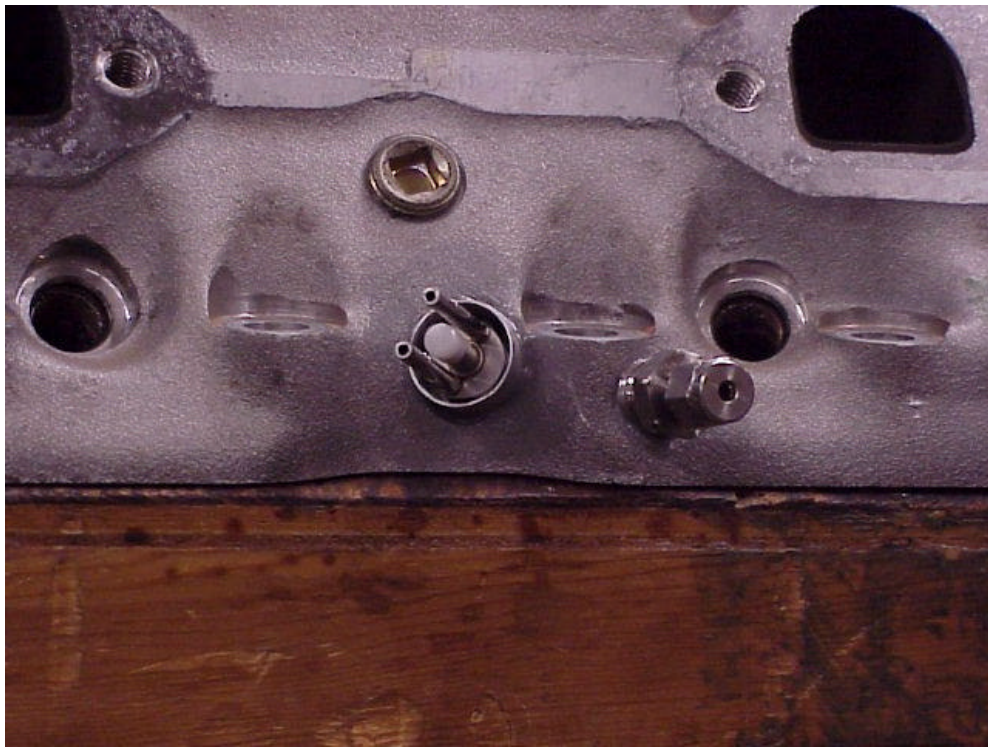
Engine Head Modification to Allow 7061 Transducer Access
